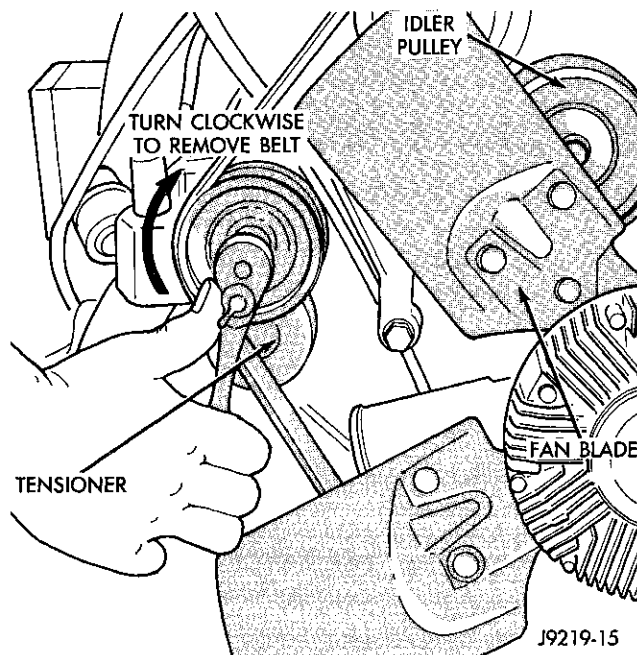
Belt Tensioner—3.9L V-6 or 5.2/5.9L V-8 LDC-Gas Engines
